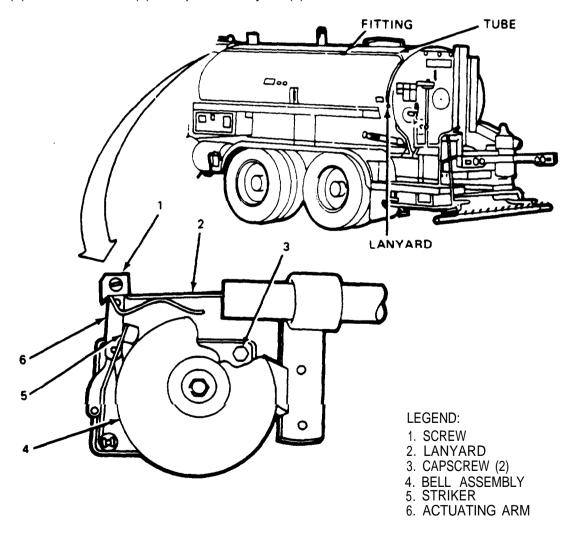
Remove/Install Bell Mechanism and Lanyard.
